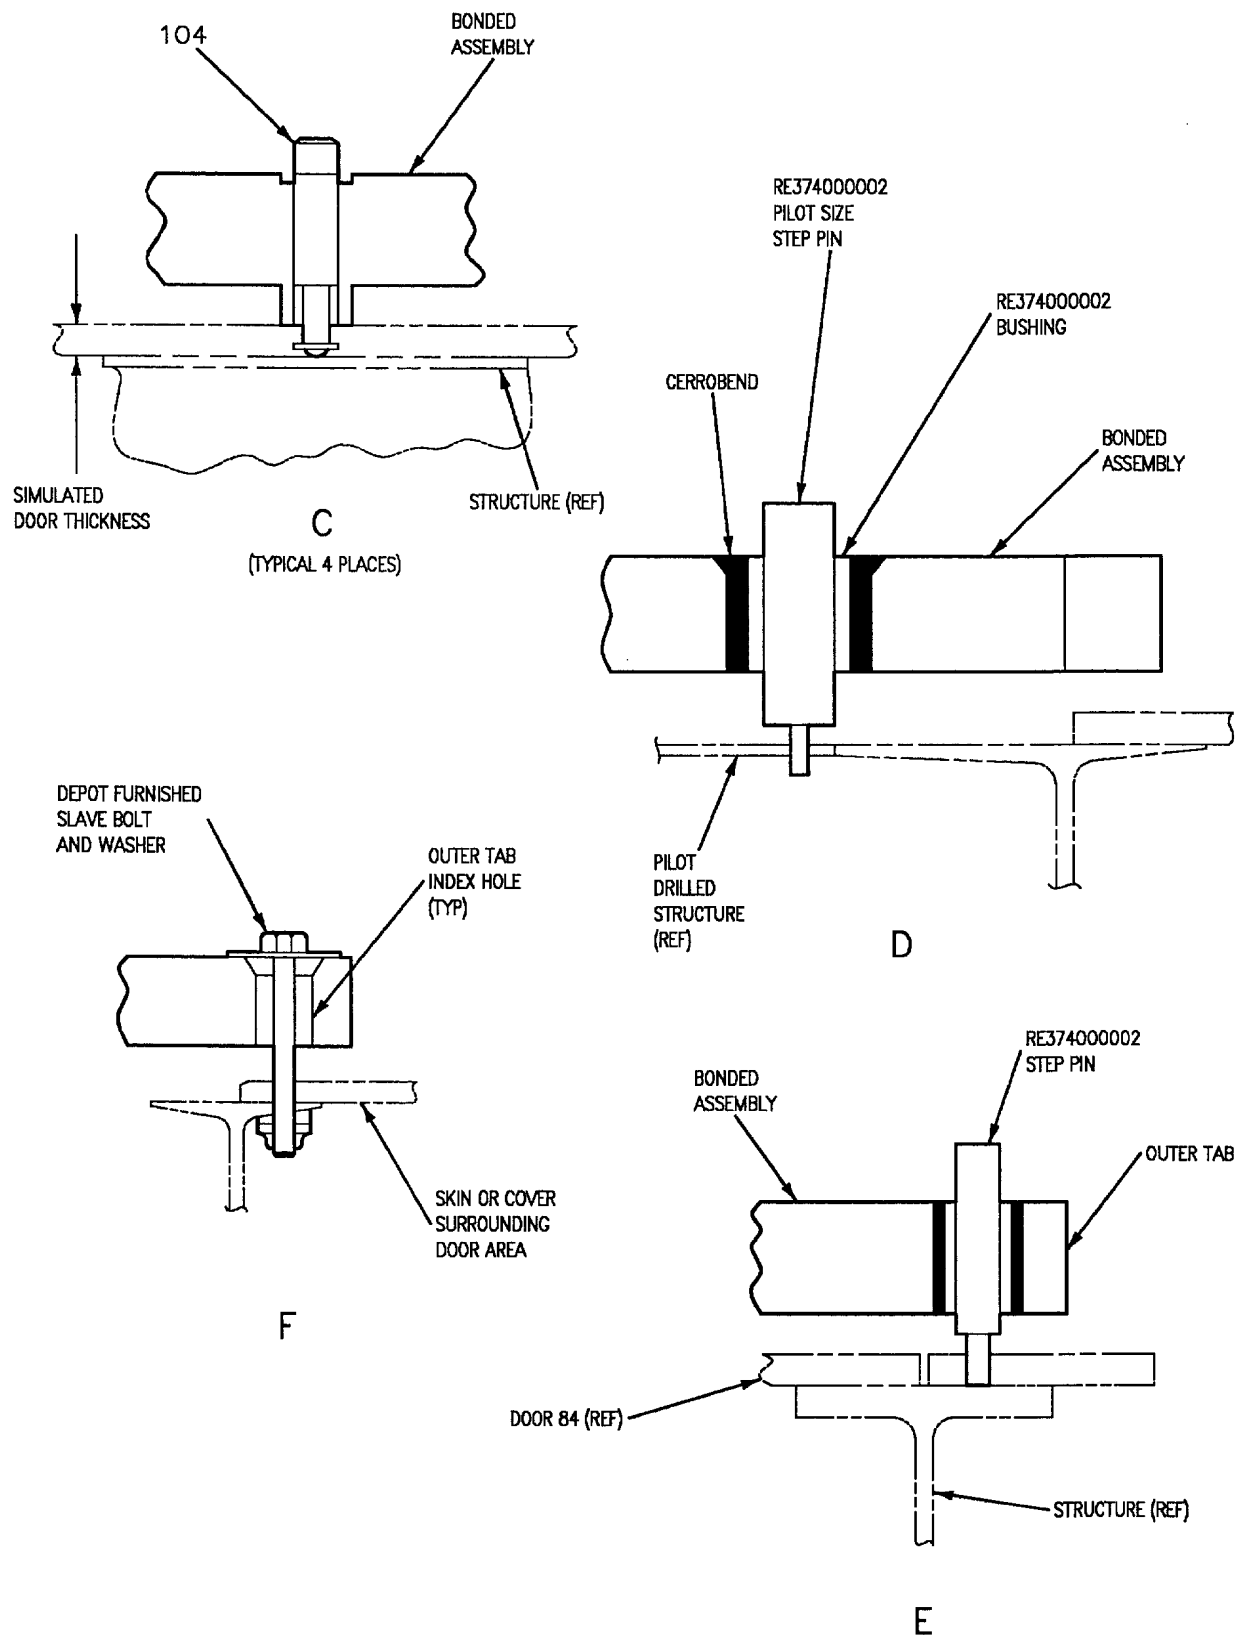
Installation of Plate Set for Drilling Door 84 and Substructure (Sheet 3)
